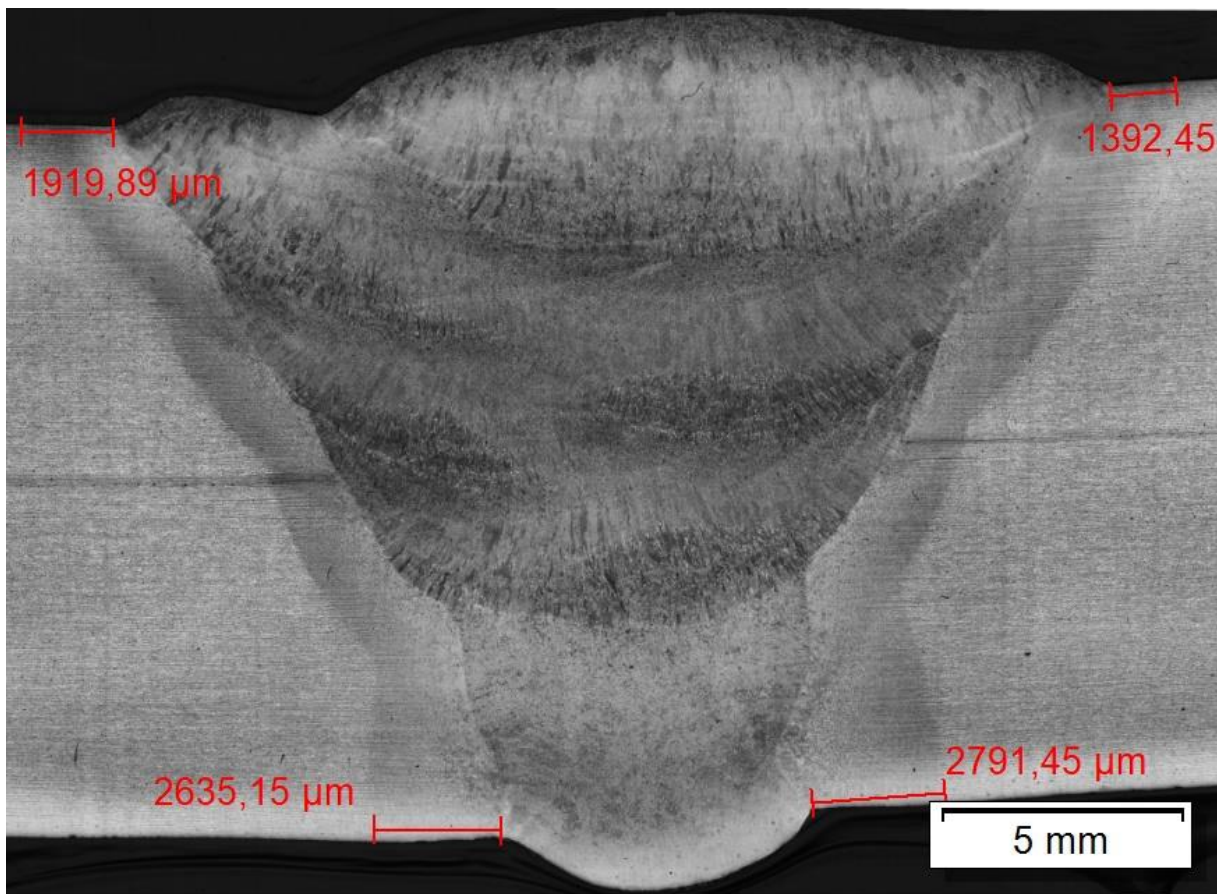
Macrograph of a multipass weld with corresponding heat-affected zones. The specimen extracted from the plate the welding procedure qualification was based on with a single weld. Etching reagent: 2% nital.
